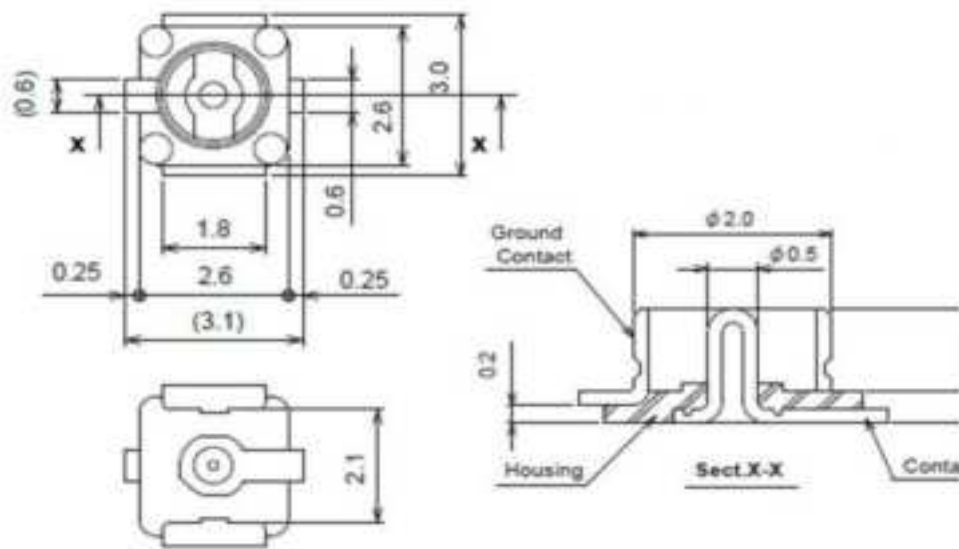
Recommended PCB Footprint of RF-WM-11AFB1 (mm)
